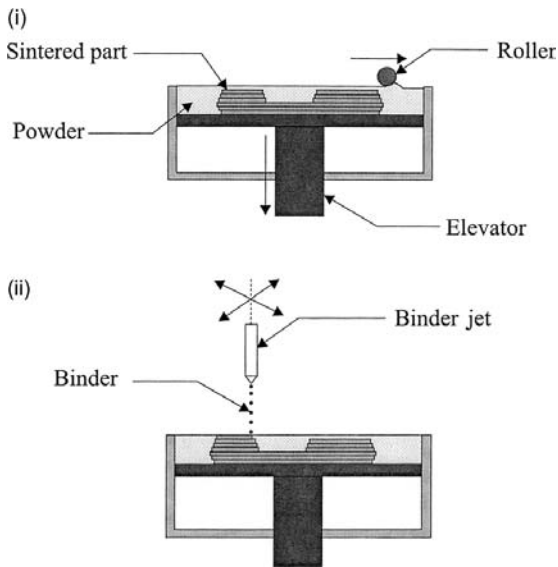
Binder sintering. (i) The elevator is lowered, and a roller is used to drag a controlled amount of powder from an external material source and spread it in the build chamber. (ii) A fluid binder is selectively sprayed onto the powder.
